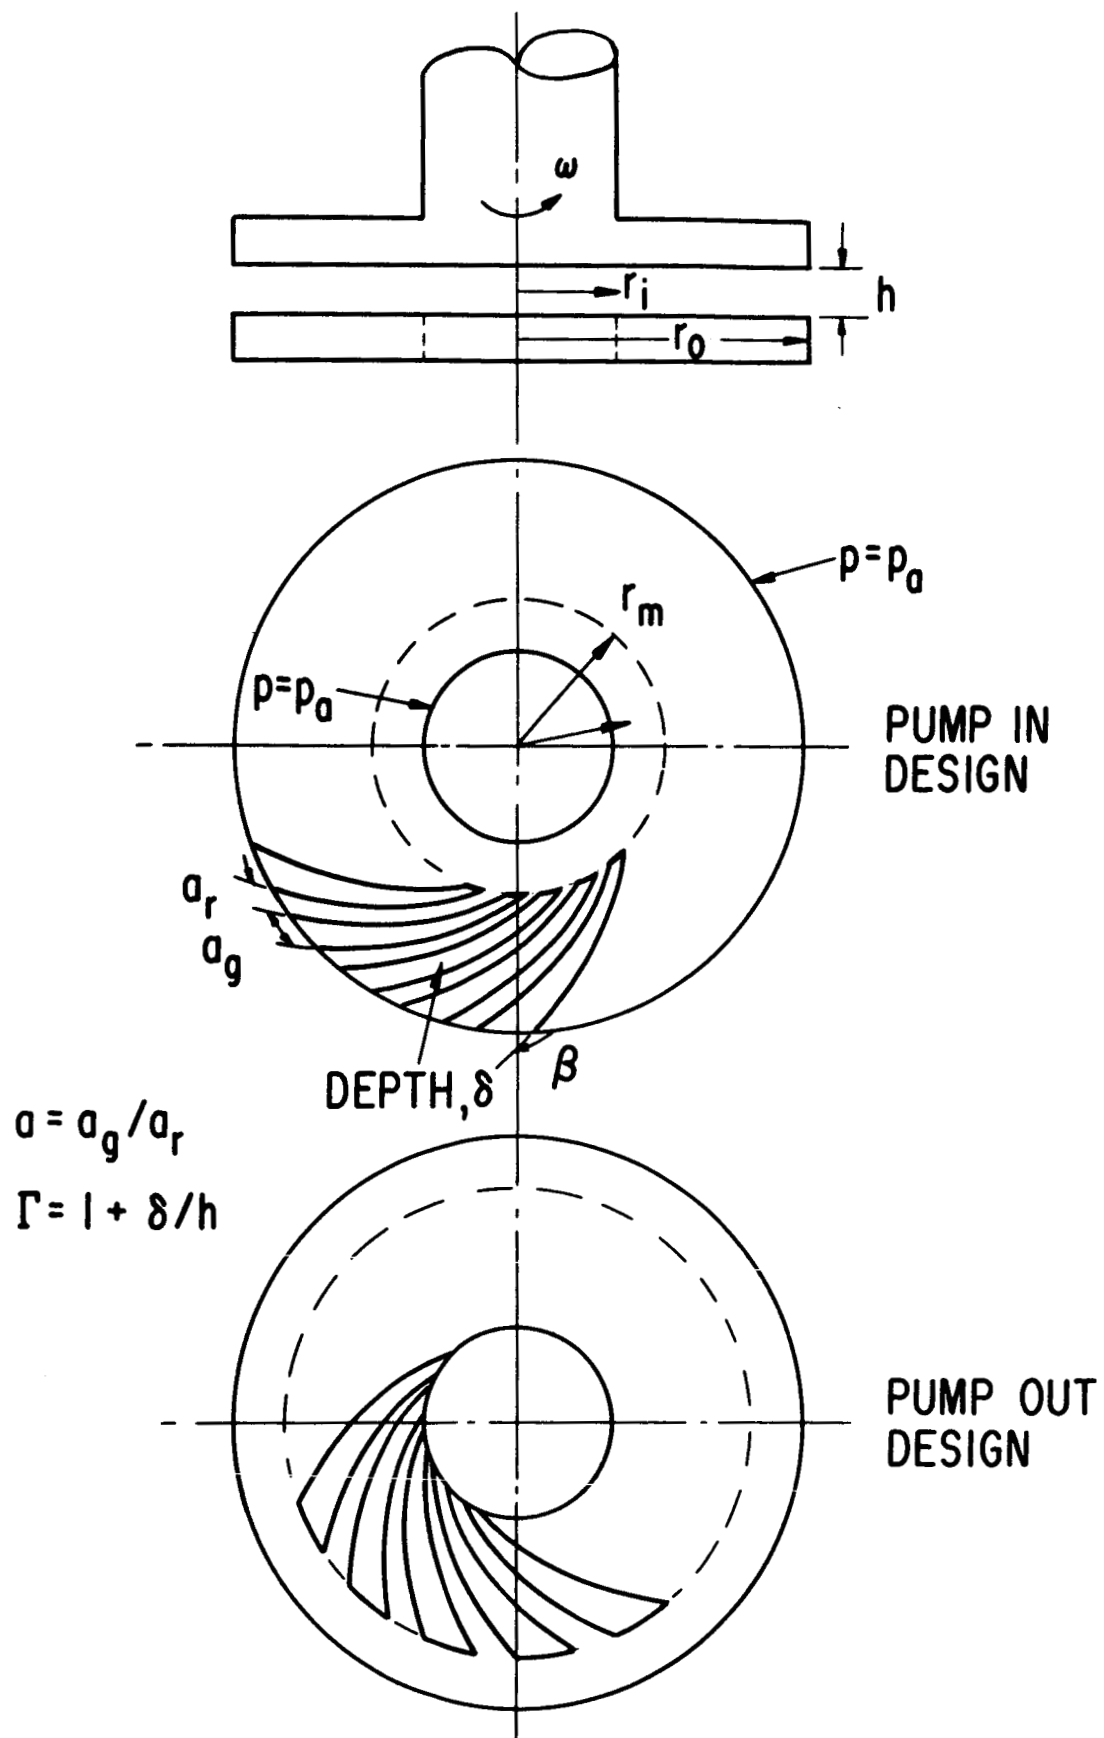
Schematic of Spiral-Grooved Thrust Bearing.
